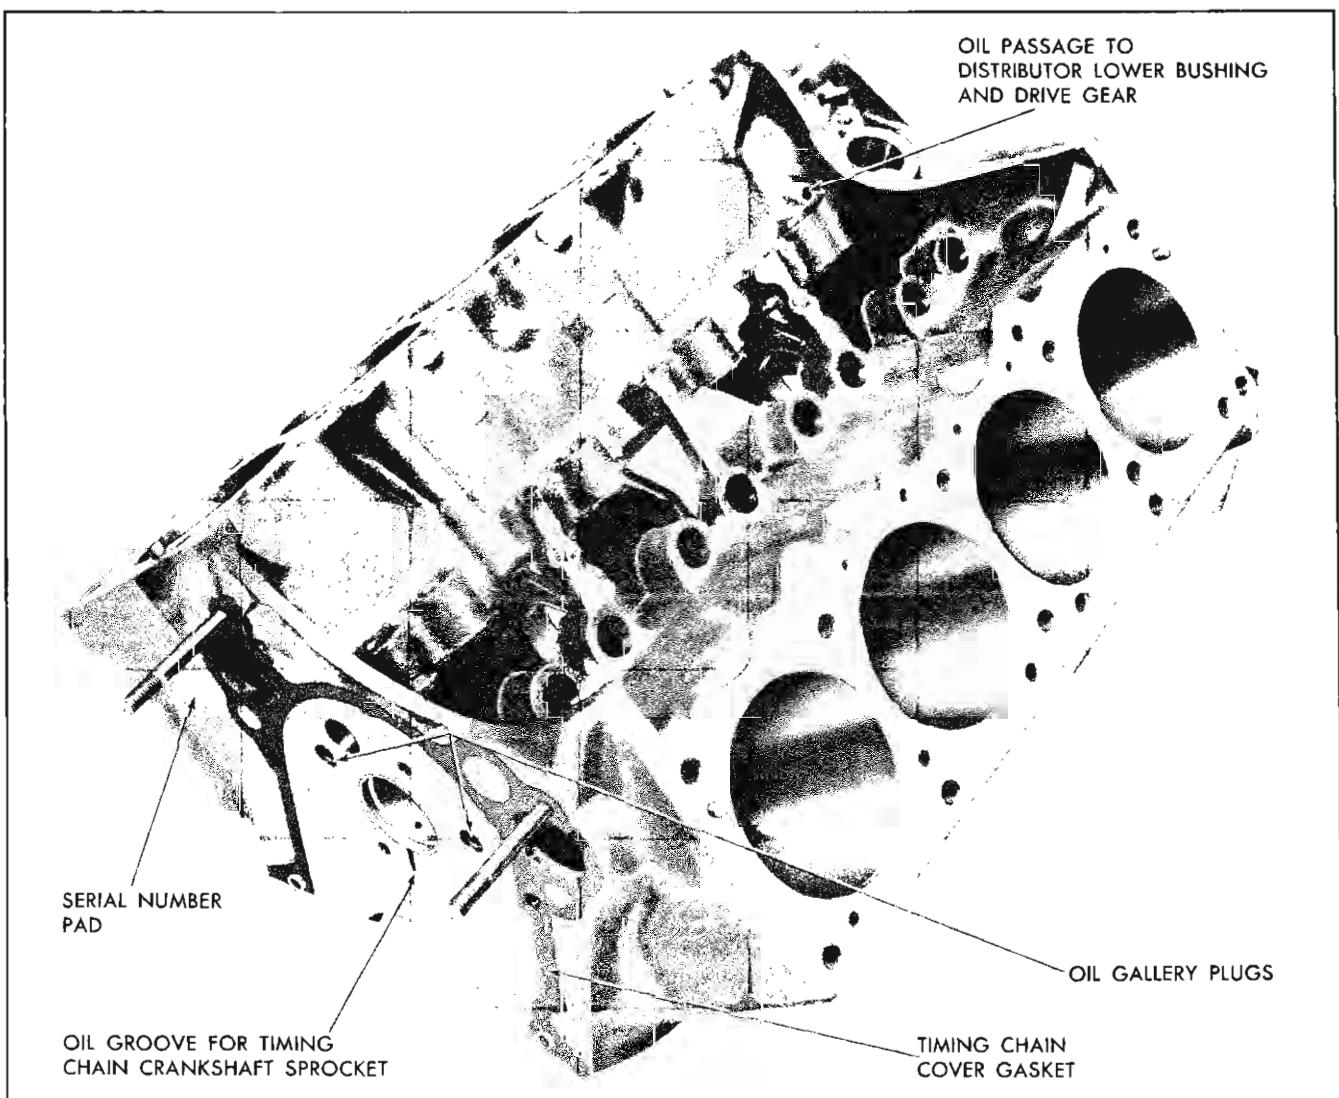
Cylinder Block—View from Left Front—V-8 Engine
